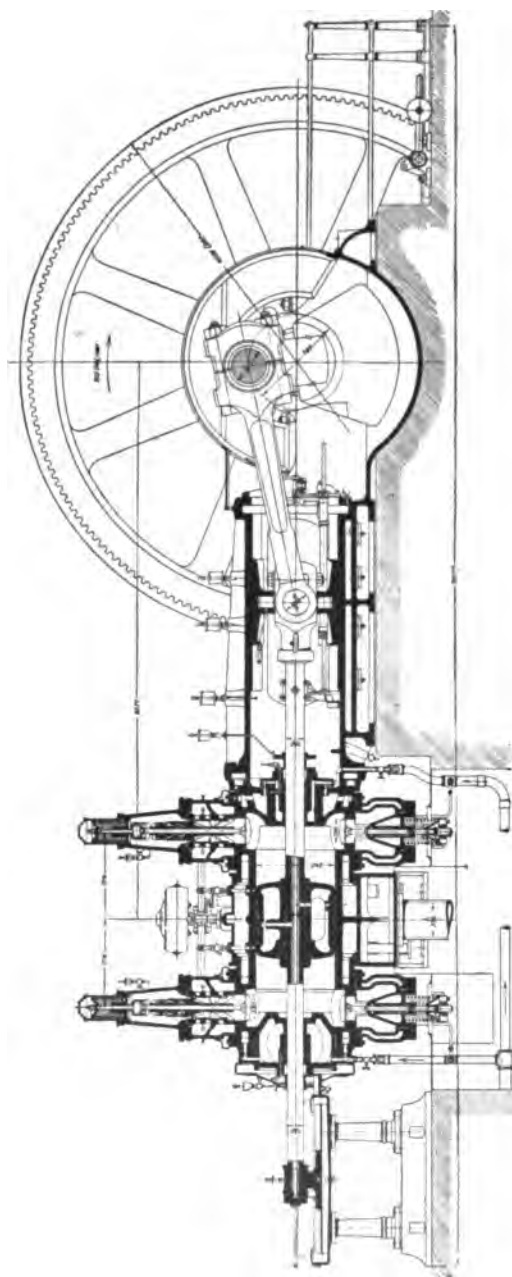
600 B. H. P. Deutz Engine.
